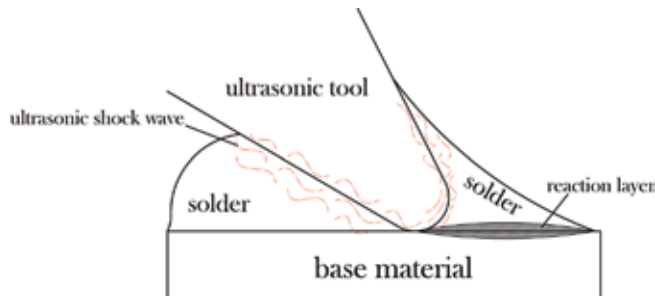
Schematic of ultrasonic vibration soldering with an ultrasonic soldering iron [4].
